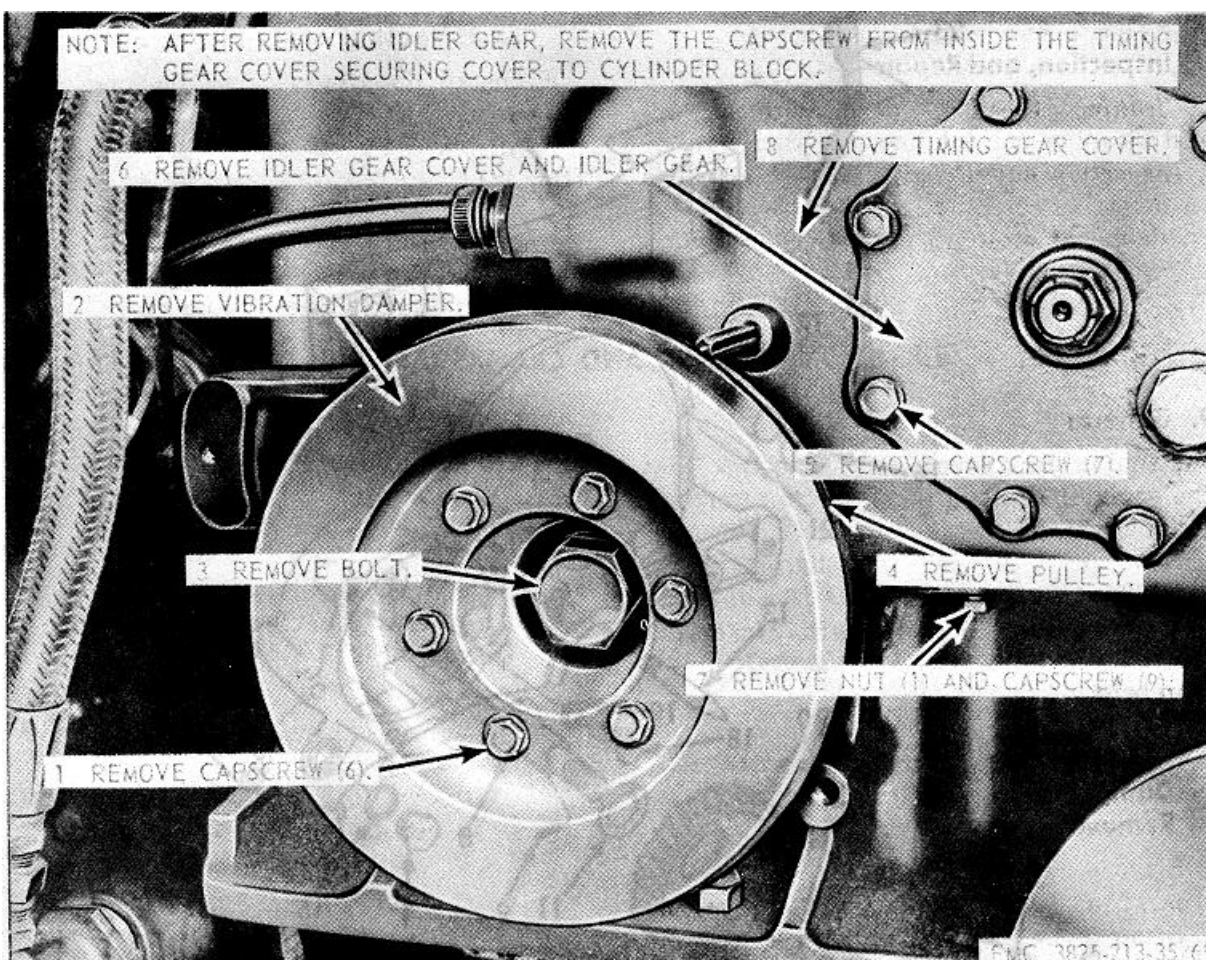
Plow and carrier engine vibration damper, idler gear, and timing gear cover, removal and installation.
